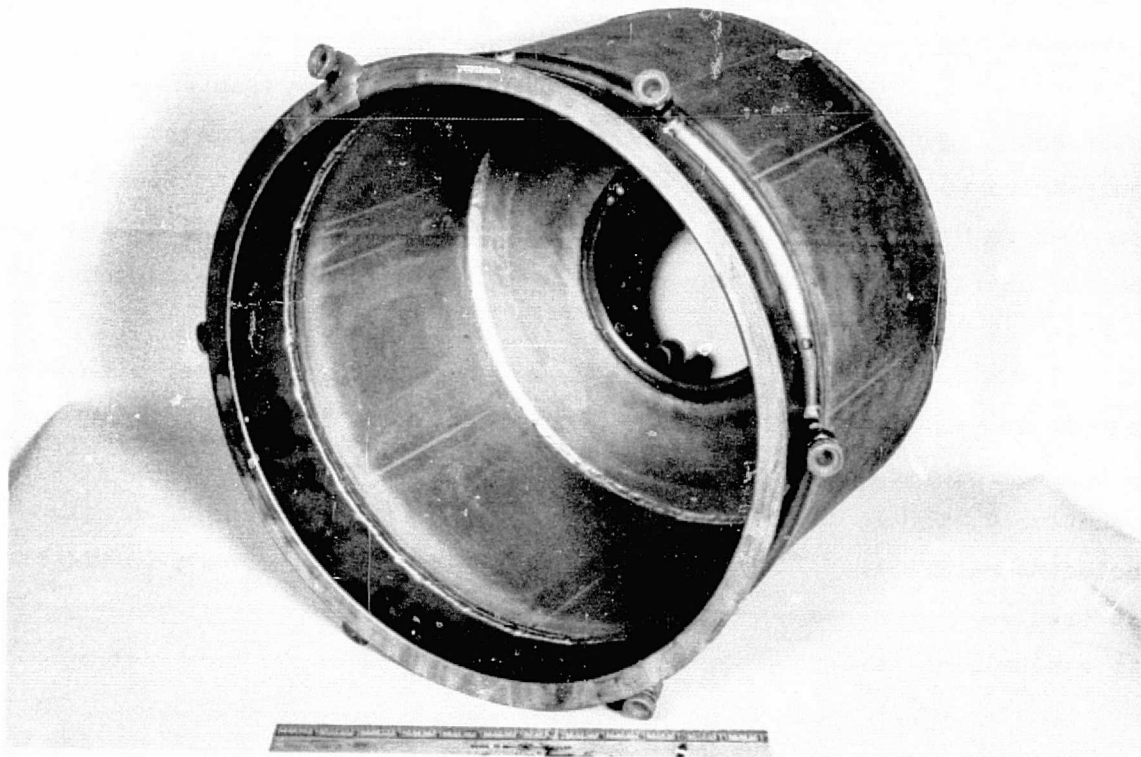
PROTOTYPE 2 FLASH EVAPORATOR
